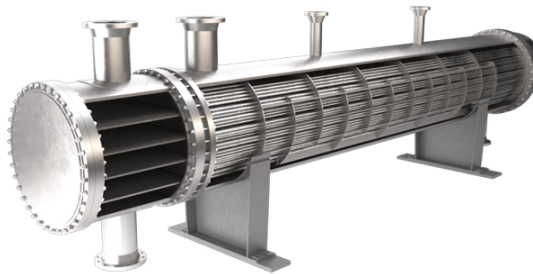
Shell and tube heat exchanger model by Aager, [2023](#)
